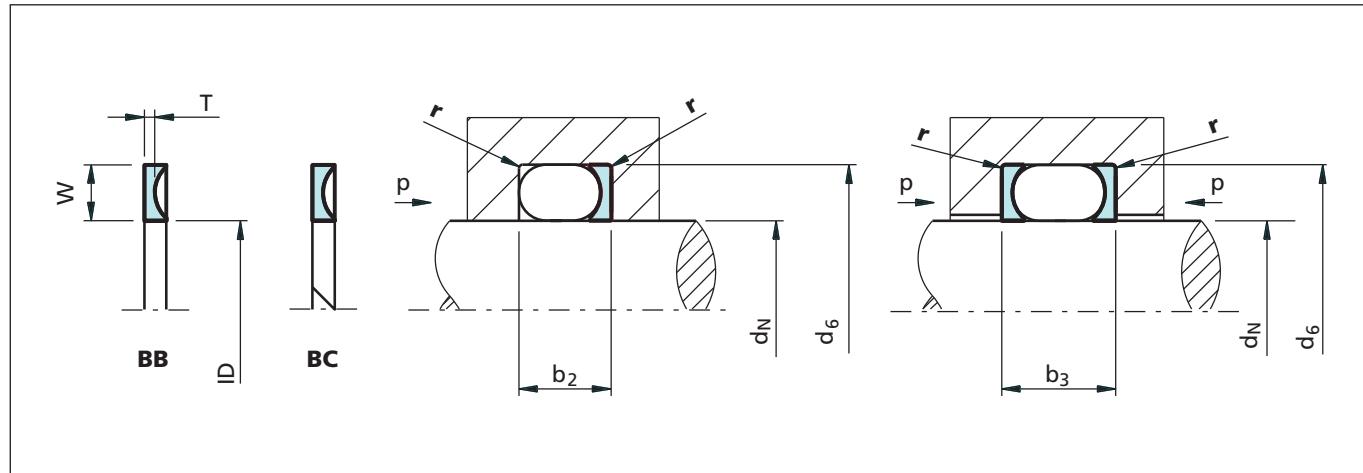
Installation drawing internal sealing, concave Back-up Ring types
